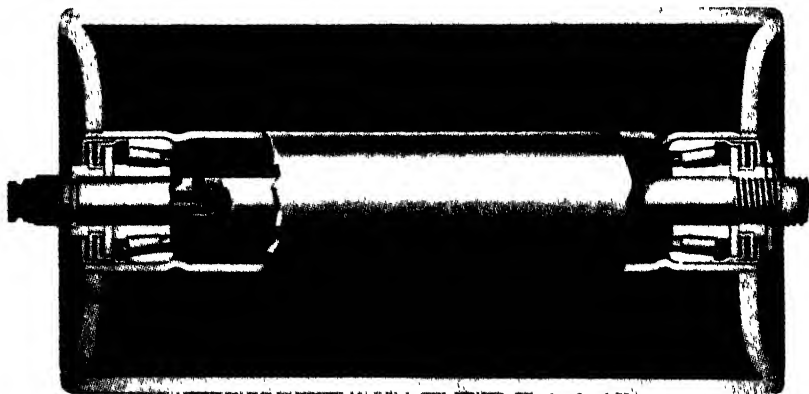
Cross-sectional View of a Roll. (Chain Belt Company.)
